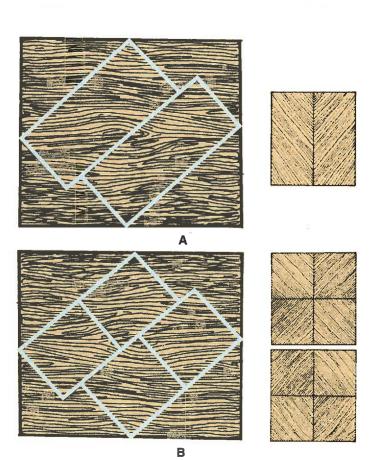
A—Layout for V match. B—Layout for reverse diamond and diamond matches.
